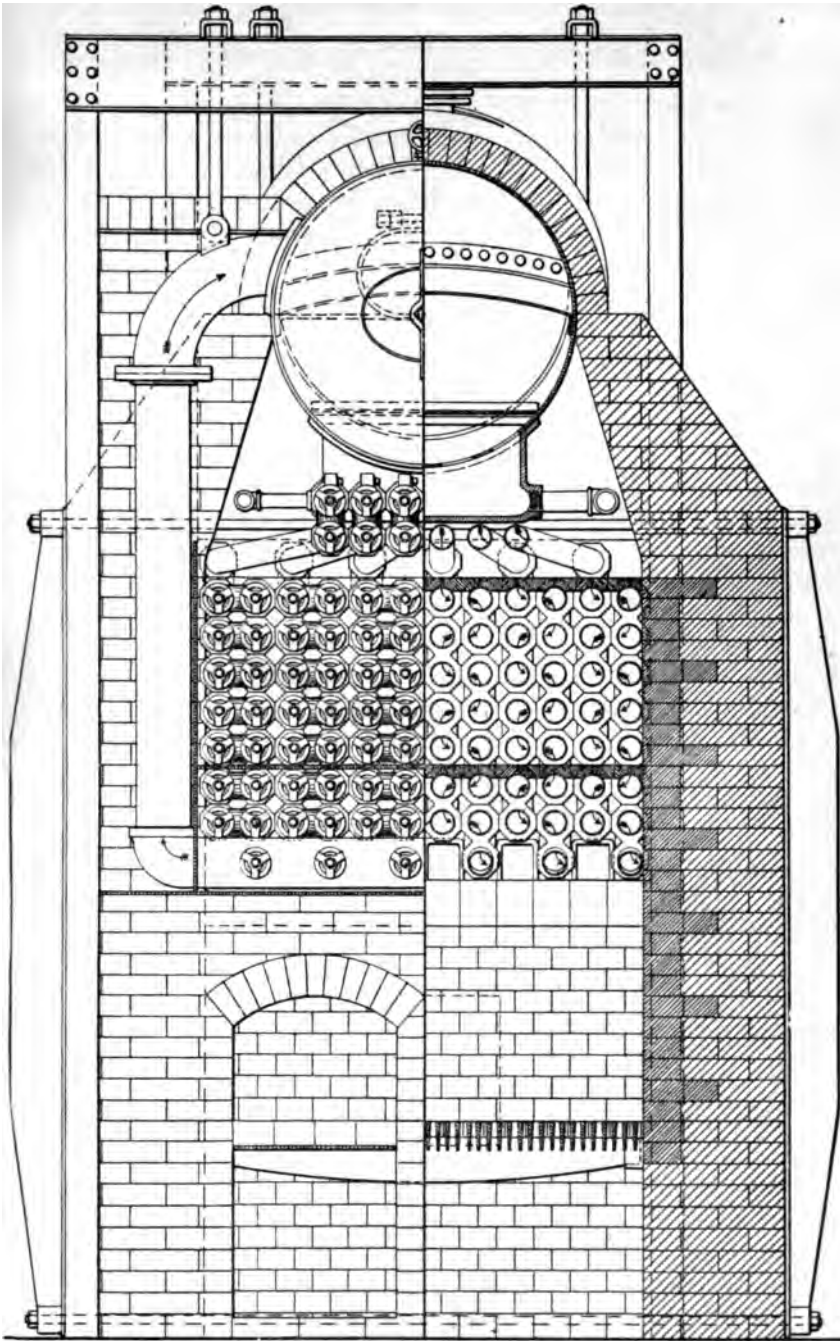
SECTIONAL ELEVATION—ONE DRUM DESIGN.
